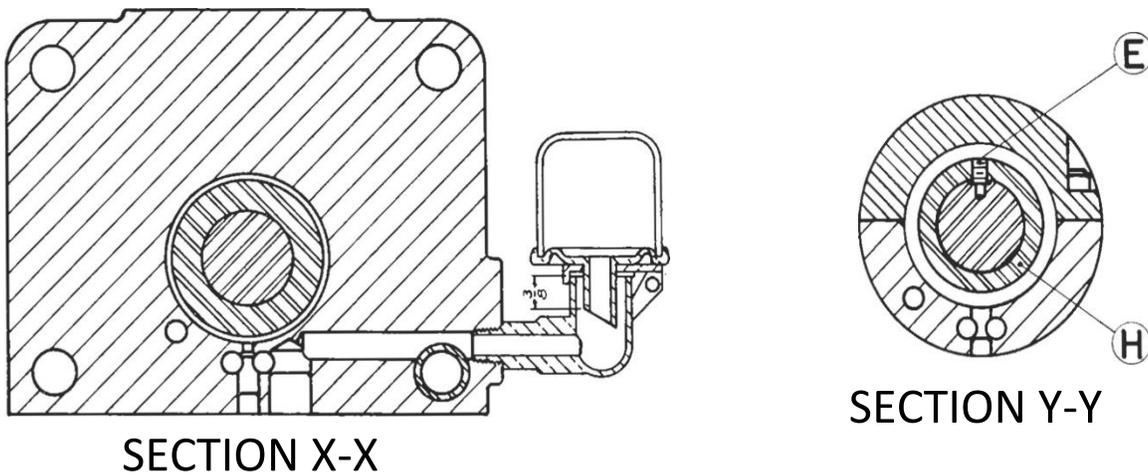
Cutaway View of the Plain Bearing Spindle Unit
